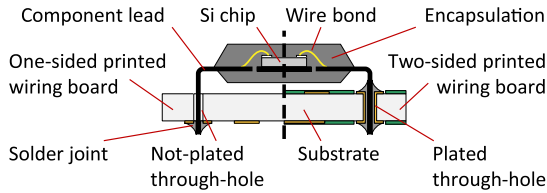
Schematic of a soldered through-hole component; formation of solder joint in the case of not-plated through-holes (left side) and plated through-holes (right side). *Reproduced with permission from G. Harsányi, Elektronikai Technológia és Anyagismeret, University lecture notes, BME-ETT, 2019, ISBN: 978-963-421-791-6 [2].
